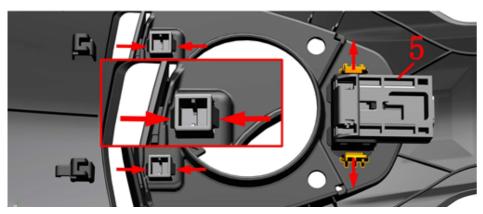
FUEL TANK COVER COMPONET		fuel Tank middle cover assembly	CHK	(0)
